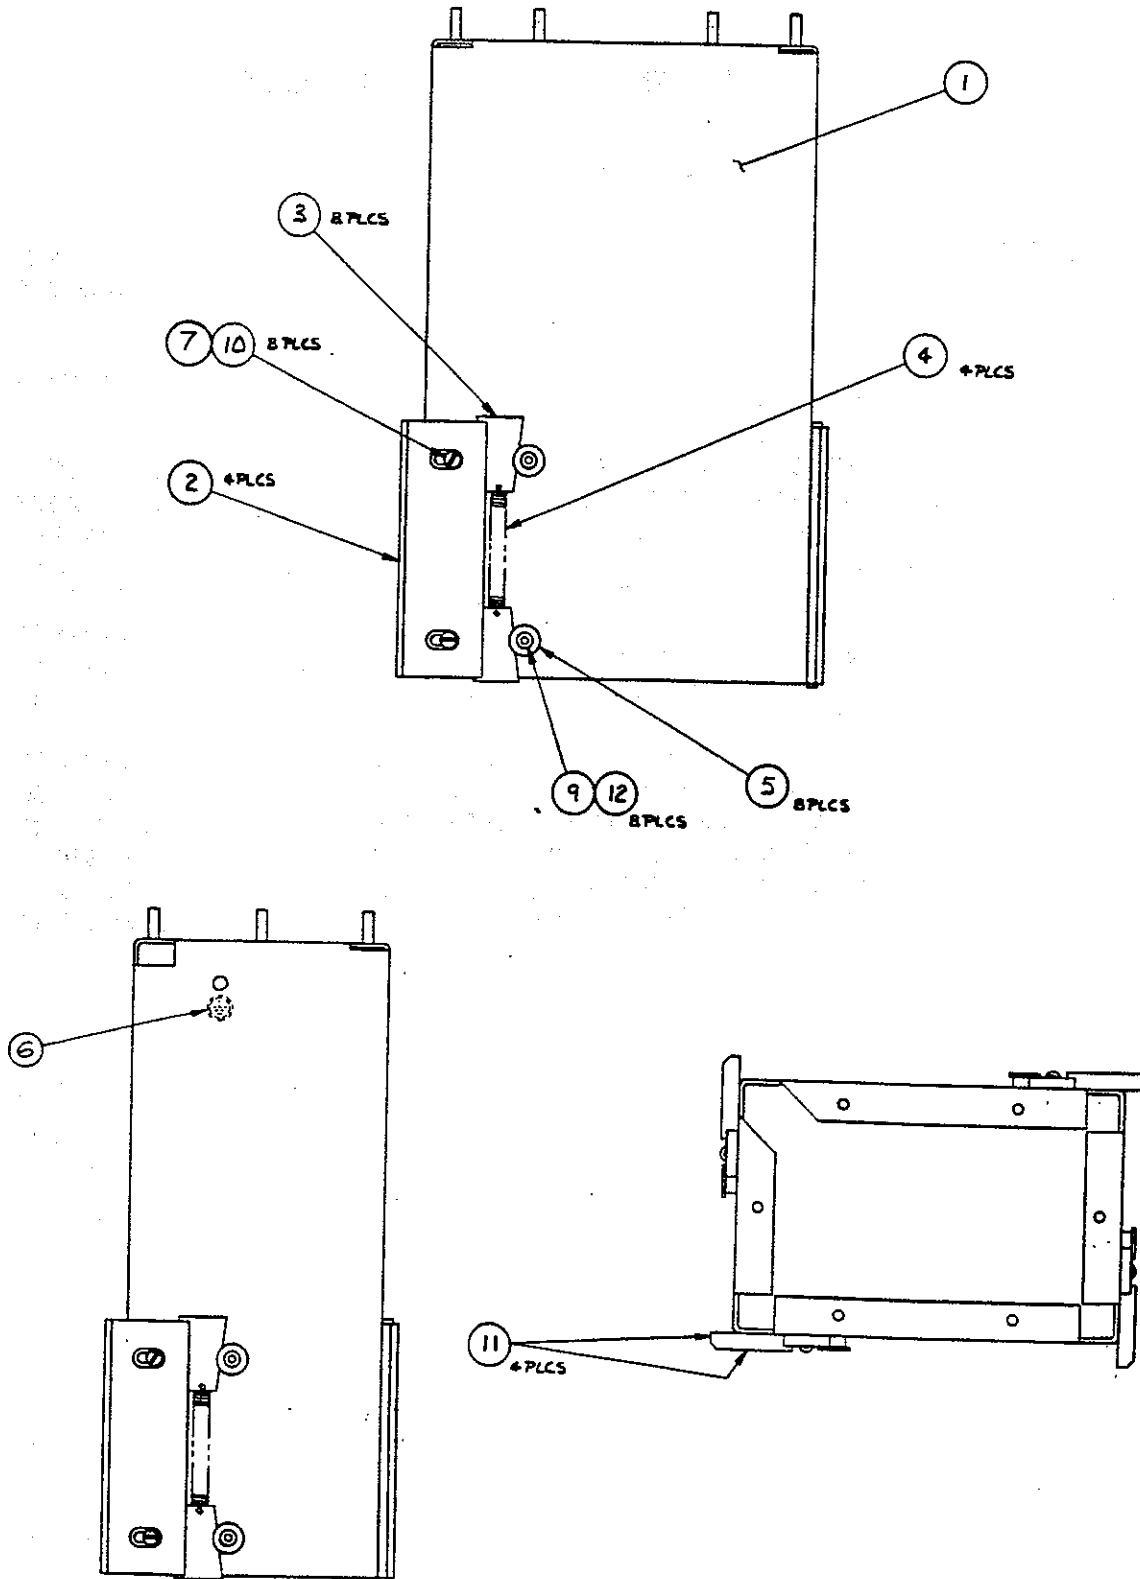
PARTS LOCATION DIAGRAM, INNER COLUMN ASSEMBLY
